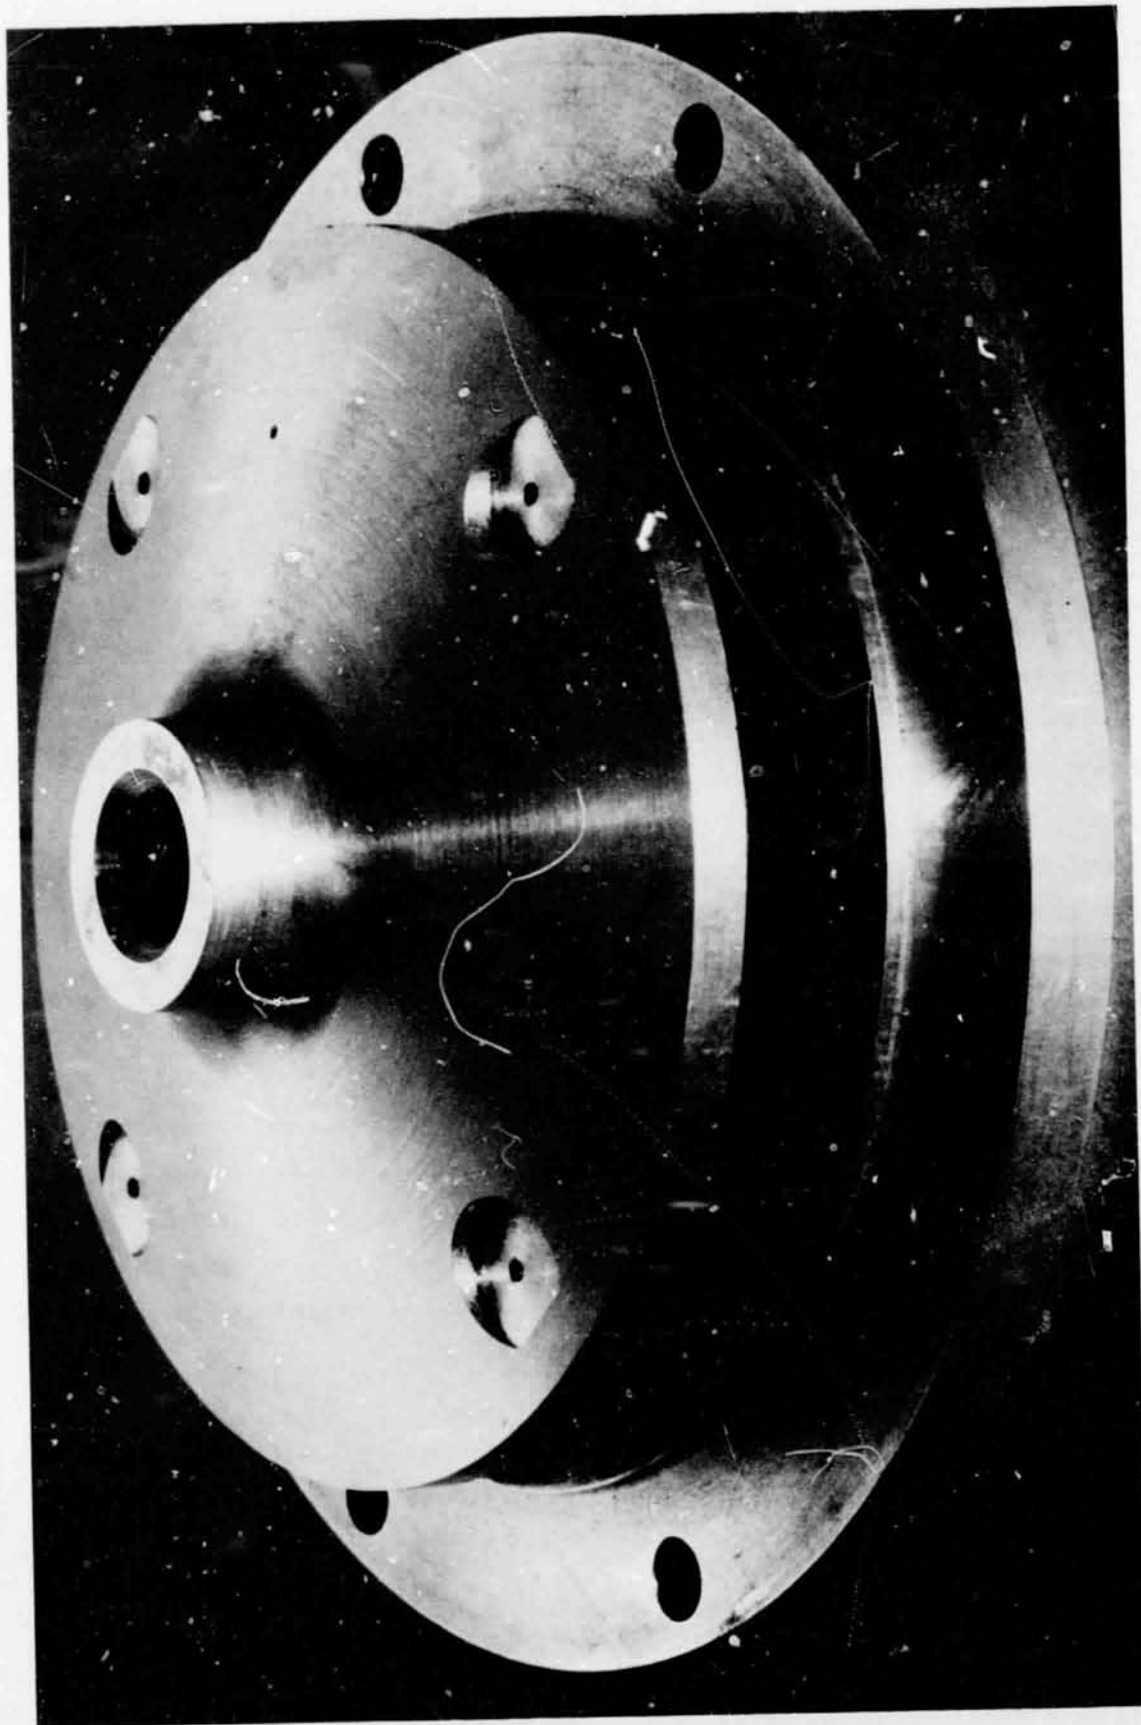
Test Assembly of Thirty Elastomer Compression Specimens, 1.27 cm Diameter by 1.27 cm High (0.5 x 0.5 in.)
